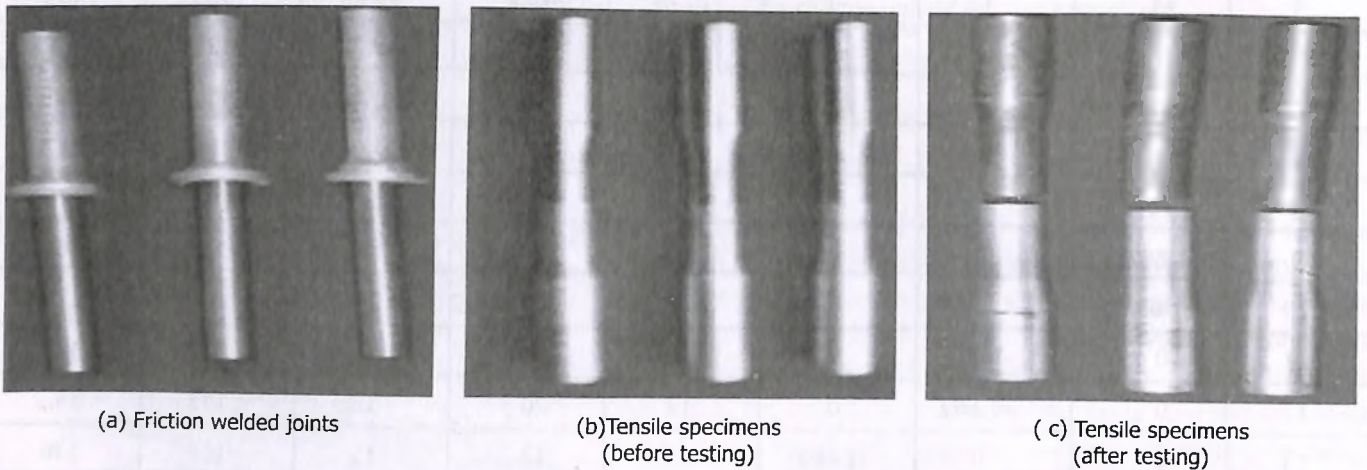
Photographs of welded joints and tensile specimens
